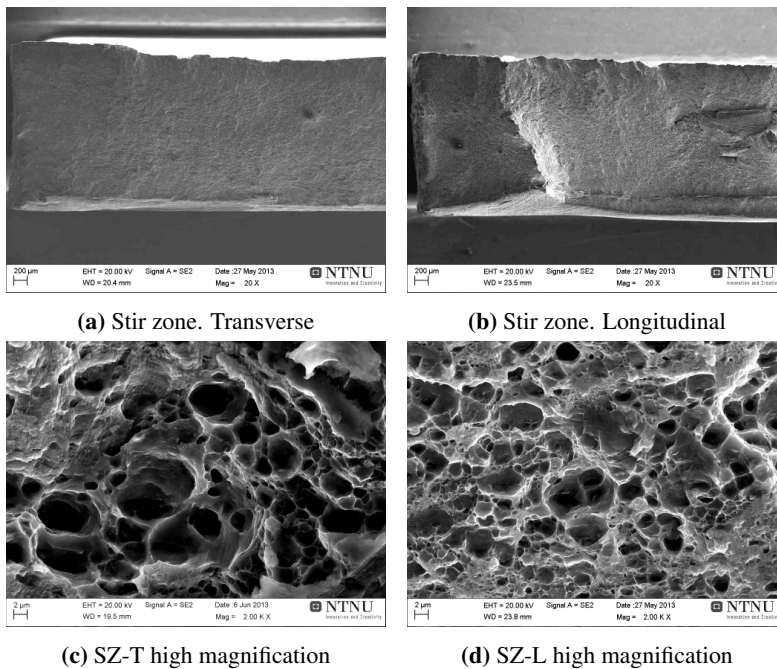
Fracture surfaces of the SZ tensile specimens transverse and longitudinal to the welding/extrusion direction.
